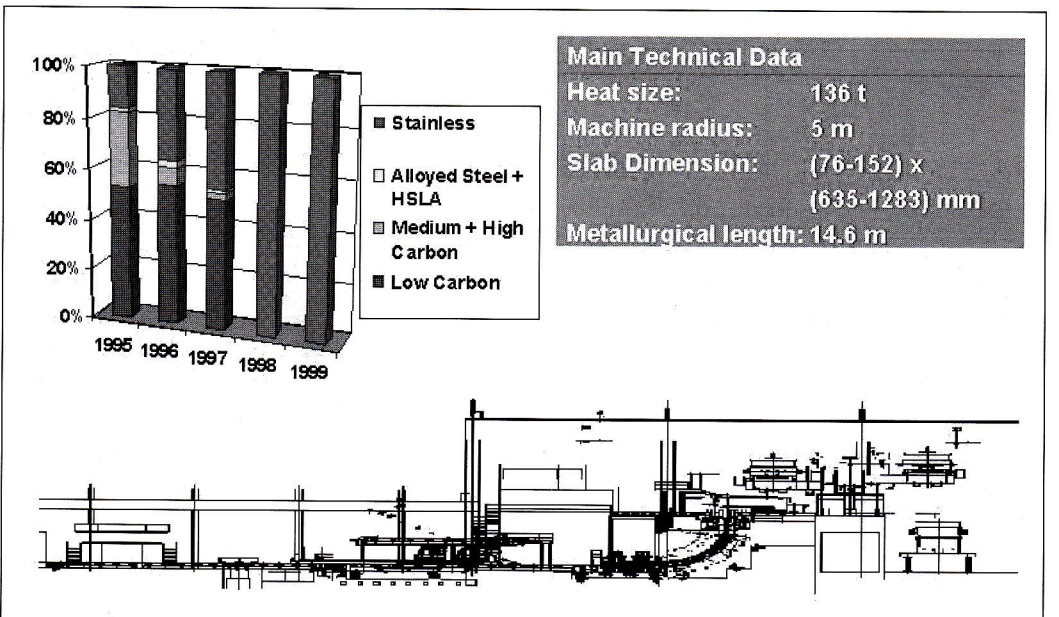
1-Strand Stainless Steel Slab Caster at Outokumpu Oy, Tornio/Finland.
